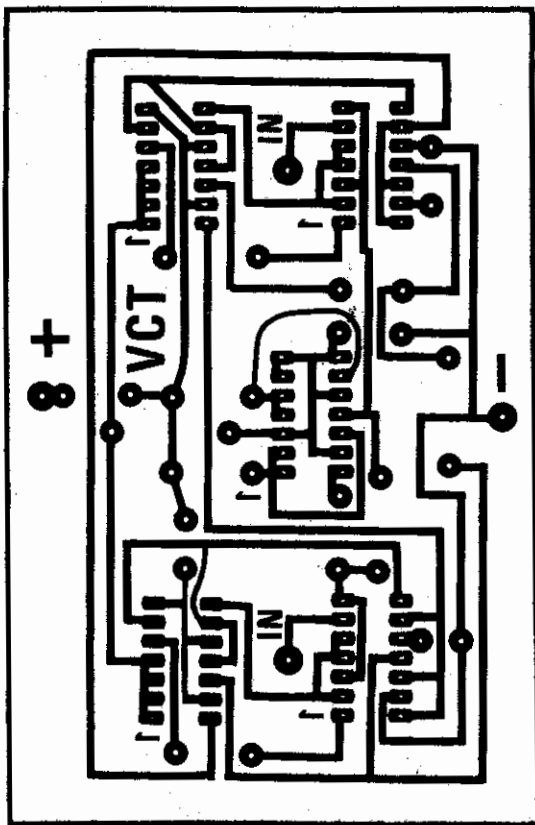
PCB layout, showing external components, wire links, etc. — view from component side.
